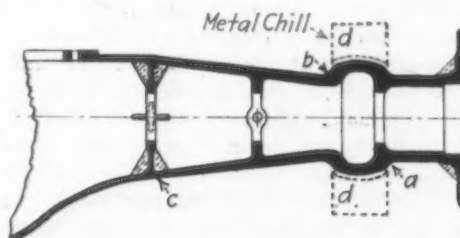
One of the First Axle Housings Made, with Location of Shrinkage Cracks Shown
